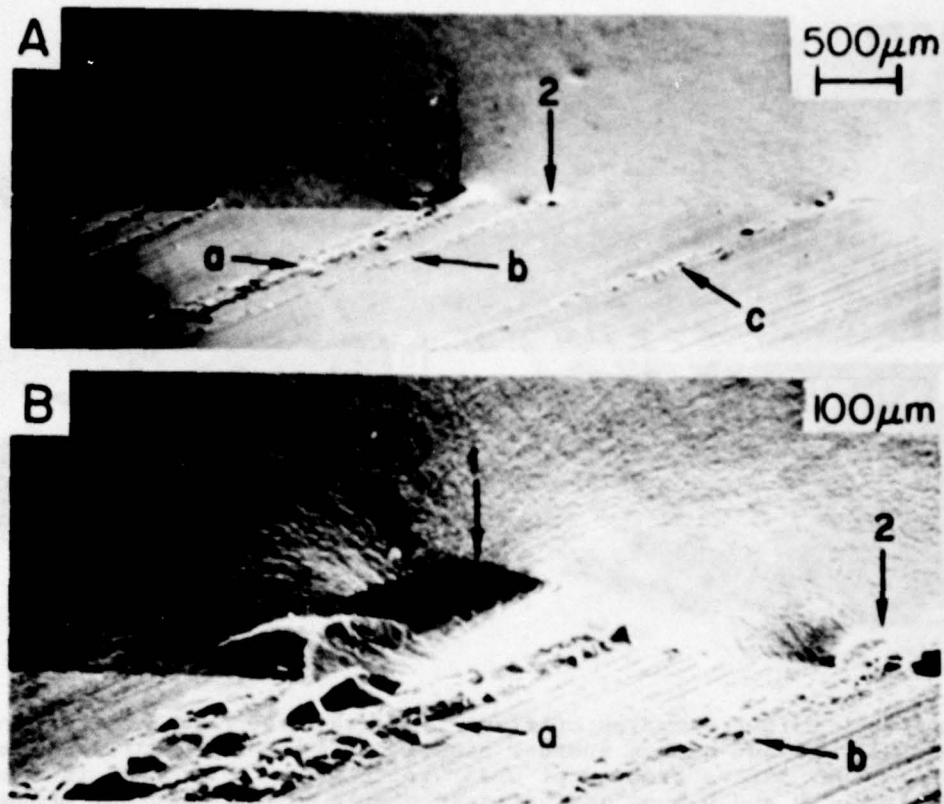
Examples of machining flaws in  $MgF_2$  from diamond sawing. A and B show the fracture surface in the vicinity of the fracture origin (upper part of photos) and part of the machined tensile surface (lower portion of photos) of dense hot pressed optical grade  $MgF_2$ . Note the deeper sawing grooves at  $\sim 45^\circ$  to the tensile axis and that each of these appears to have a machining flaw associated with it on the fracture surface e.g. note flaws 1 and 2 associated respectively with sawing scratches a and b in both photos. The larger flaw, 1, is clearly the origin of failure. Note that this flaw is somewhat less elongated than average for being  $\sim$  parallel with the machining groove. Fracture stress  $\sim 59$  MPa (8,600 psi)
